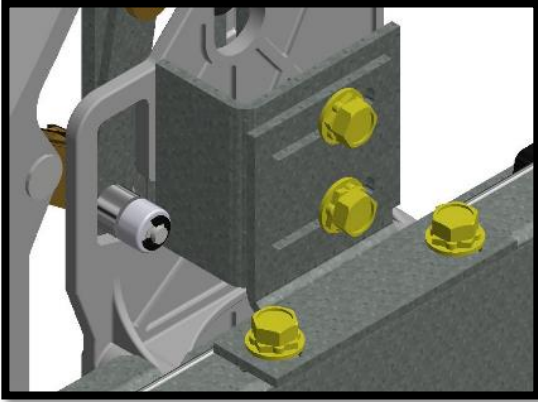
Clutch Unlock Plate Engaging Locking Arm
